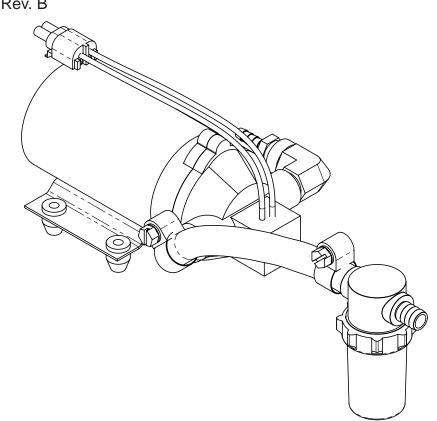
Flex Pump Assembly 601-021-800 Rev. B
